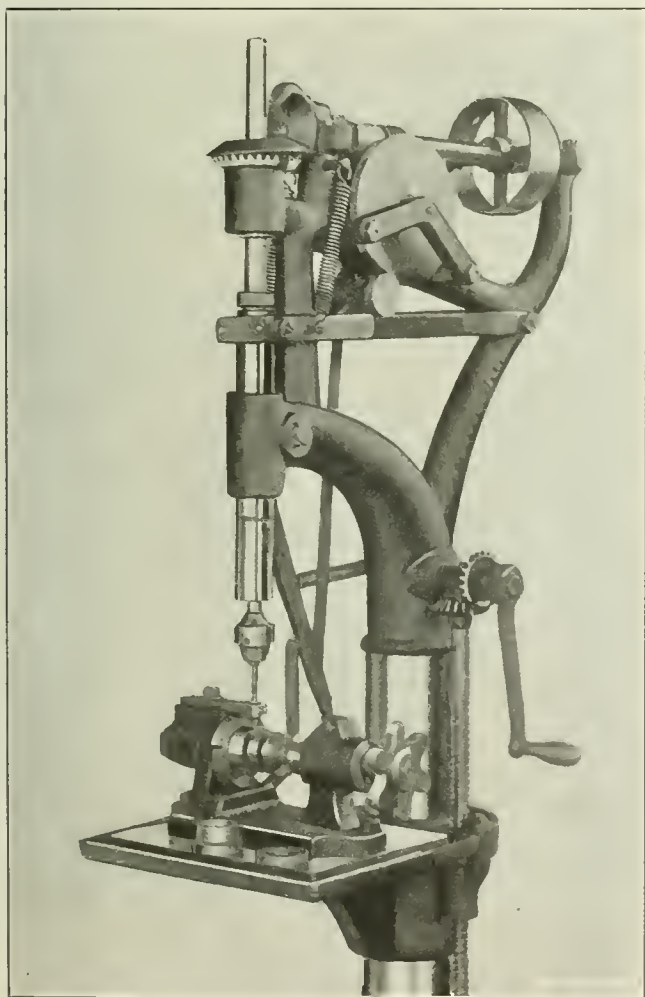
Hoyer Drill Press Adapted to drill Spanner Holes in Locking Collars automatically
